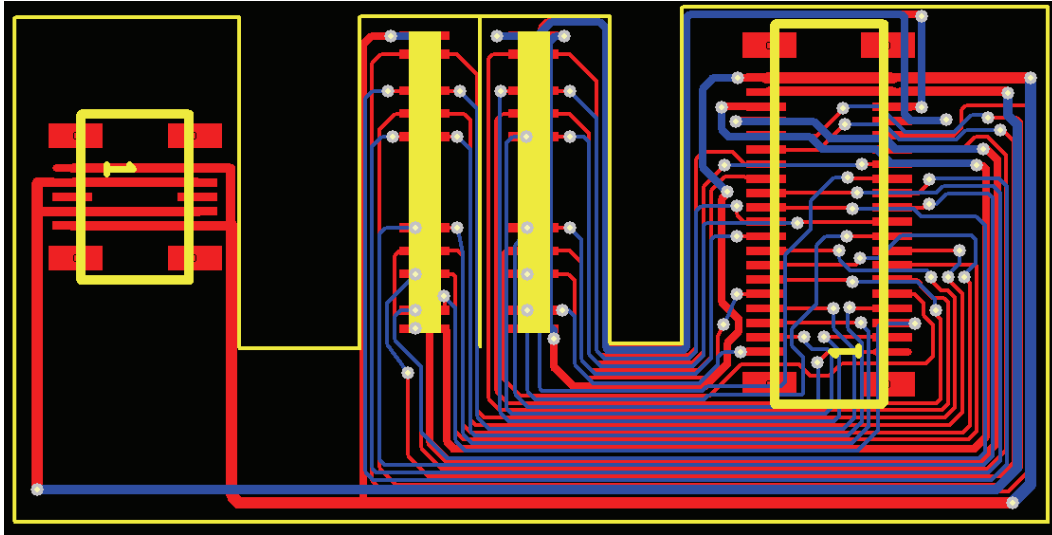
An image of the FPCB layout used for the pedicle screw FPCB.
